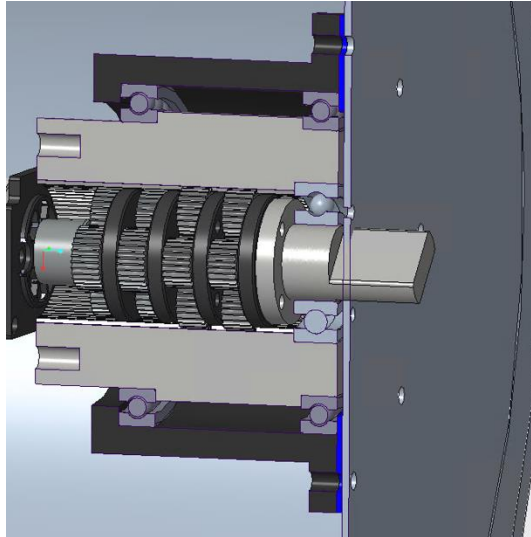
Assembly of Gearbox and Wheel with Wheel Spacer (blue)
